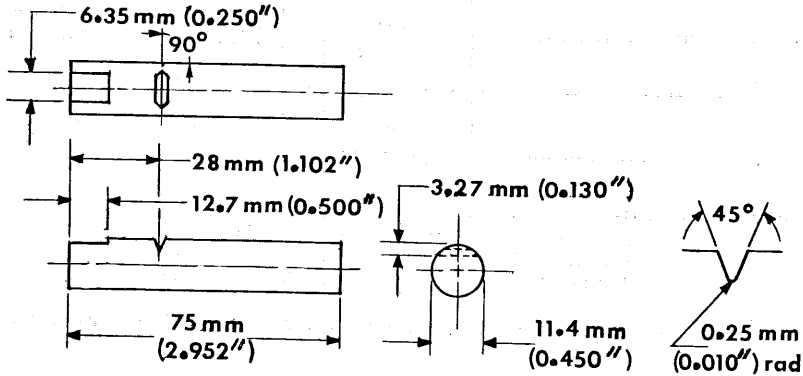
Izod (Cantilever-Beam) Impact Test Specimen for Metal Powder Structural Parts
